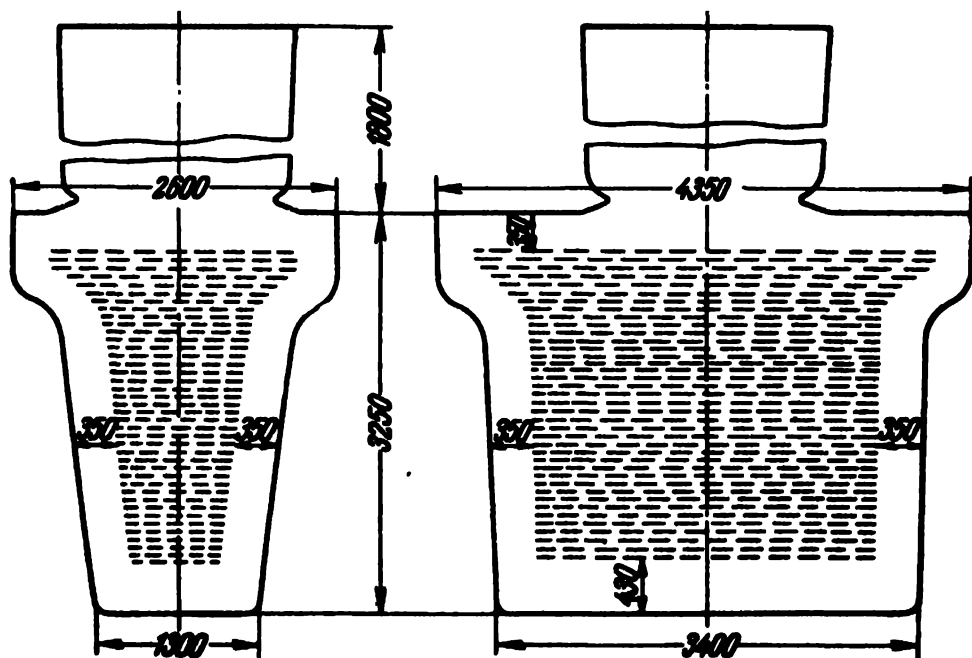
Installation of a pack of internal chills in the mould for a die bed; rough weight of the casting with the risers is 158 tons, the net weight of the casting is 116 tons
